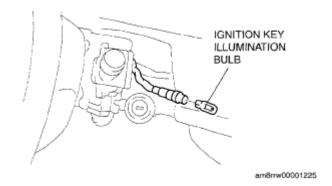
Identifying Ignition Key Illumination Bulb Courtesy of MAZDA MOTORS CORP.
